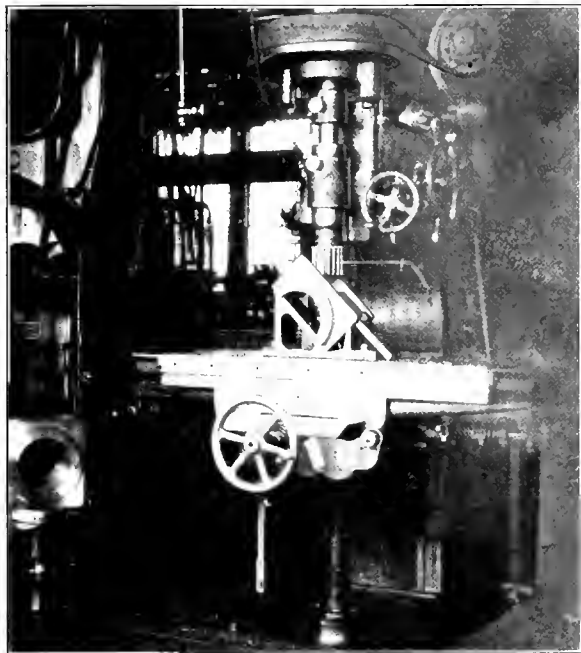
Milling the Inside Corners of the Main Rod Brasses
